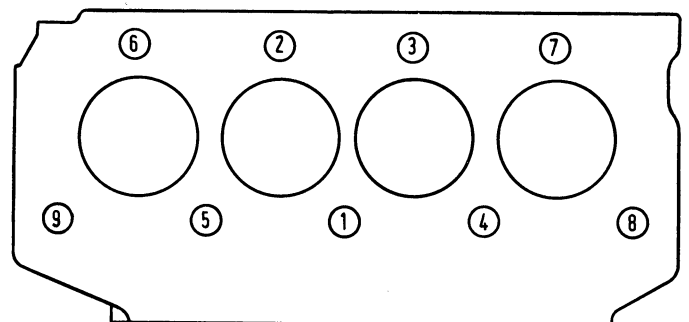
115 C.005 engine head hold-down screw tightening sequence.
